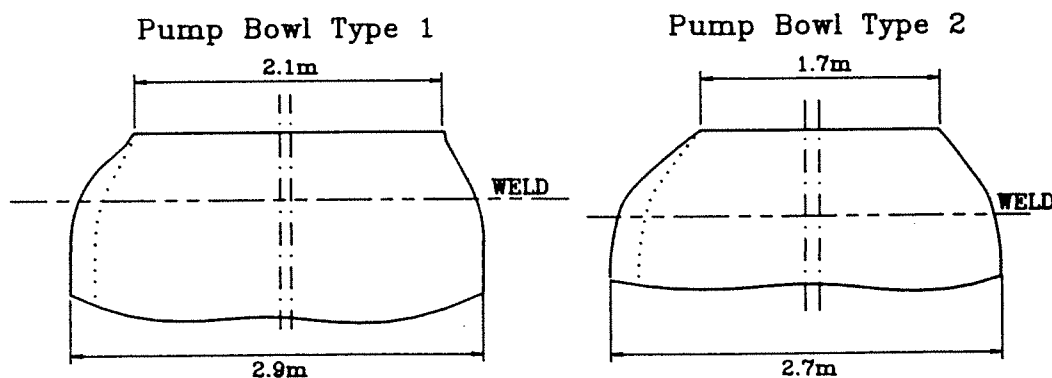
Volute Profiles of a 400 MWe, 2-Weld (type 1), and a 900 MWe, 1 or 2 Weld (type 2) pump bowl model
